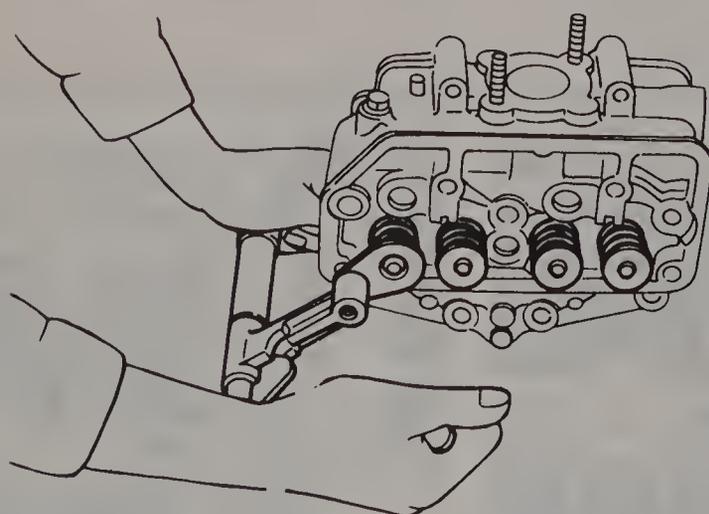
A valve spring compressor is required to remove the valves (Sec 13)
